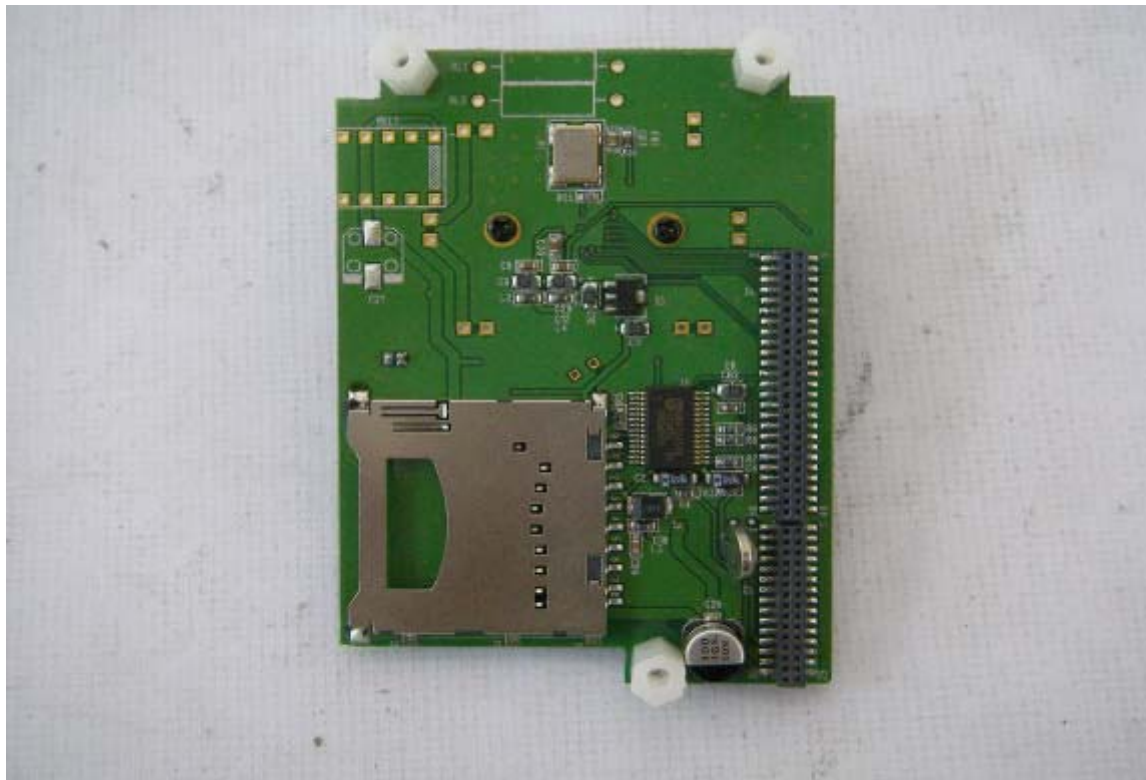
EUT SOLDERING SIDE VIEW
